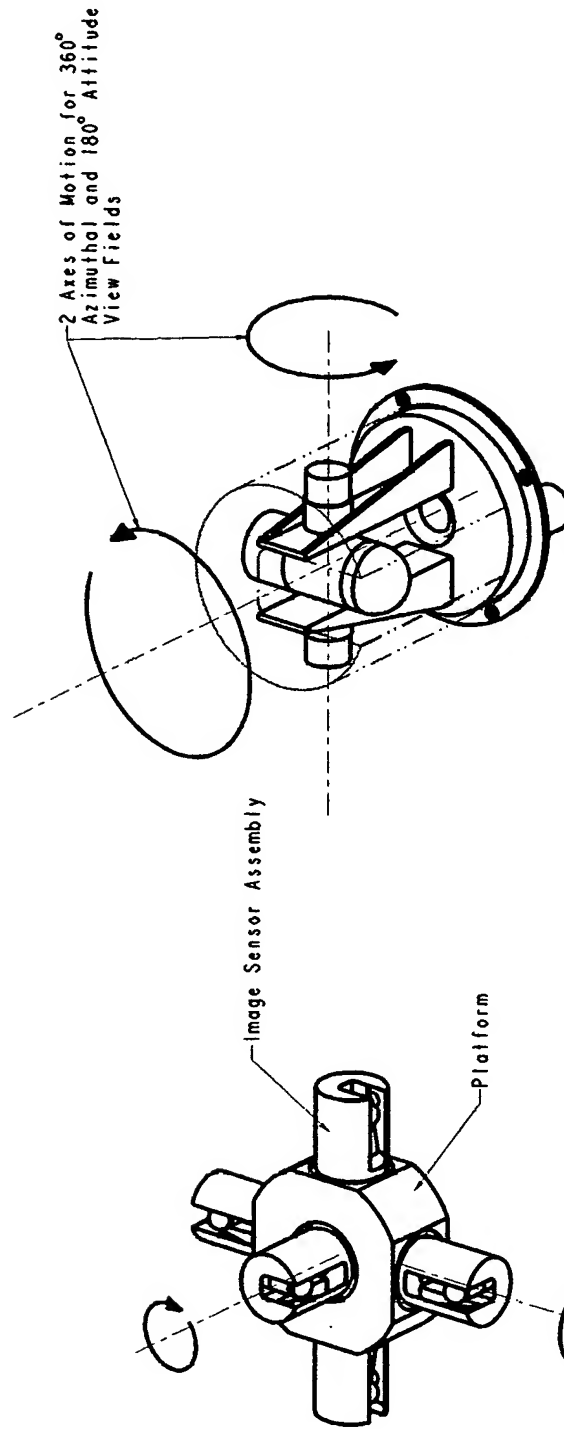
CLOSEUP OF EMBODIMENT OF IMAGE SENSOR ASSEMBLY
